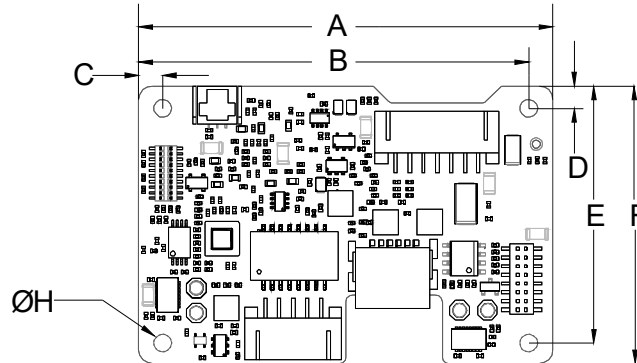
XETK-S4.2 Dimensions - Top View
